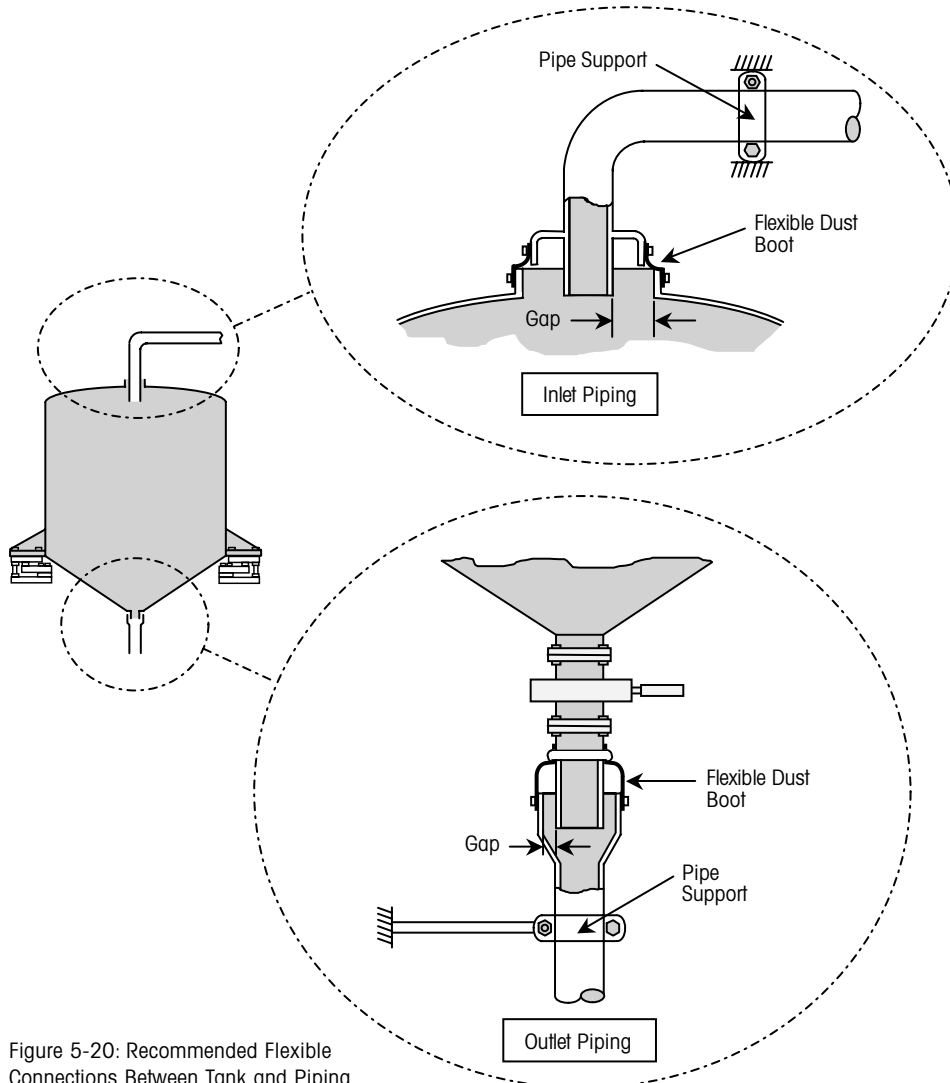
Recommended Flexible Connections Between Tank and Piping
